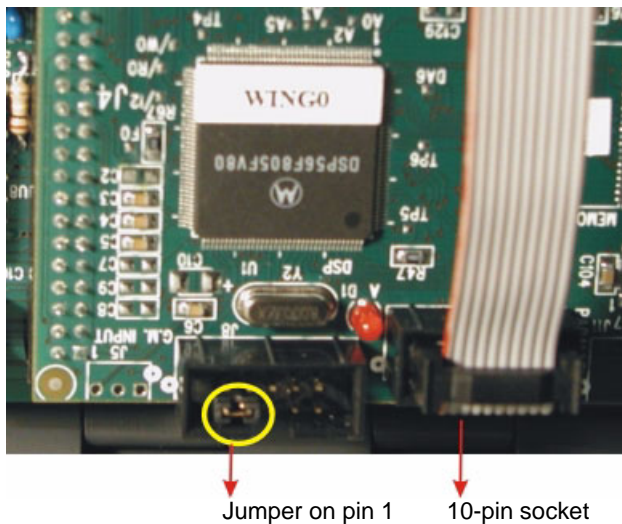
Wing card showing the jumper location and the 10-pin cable socket
